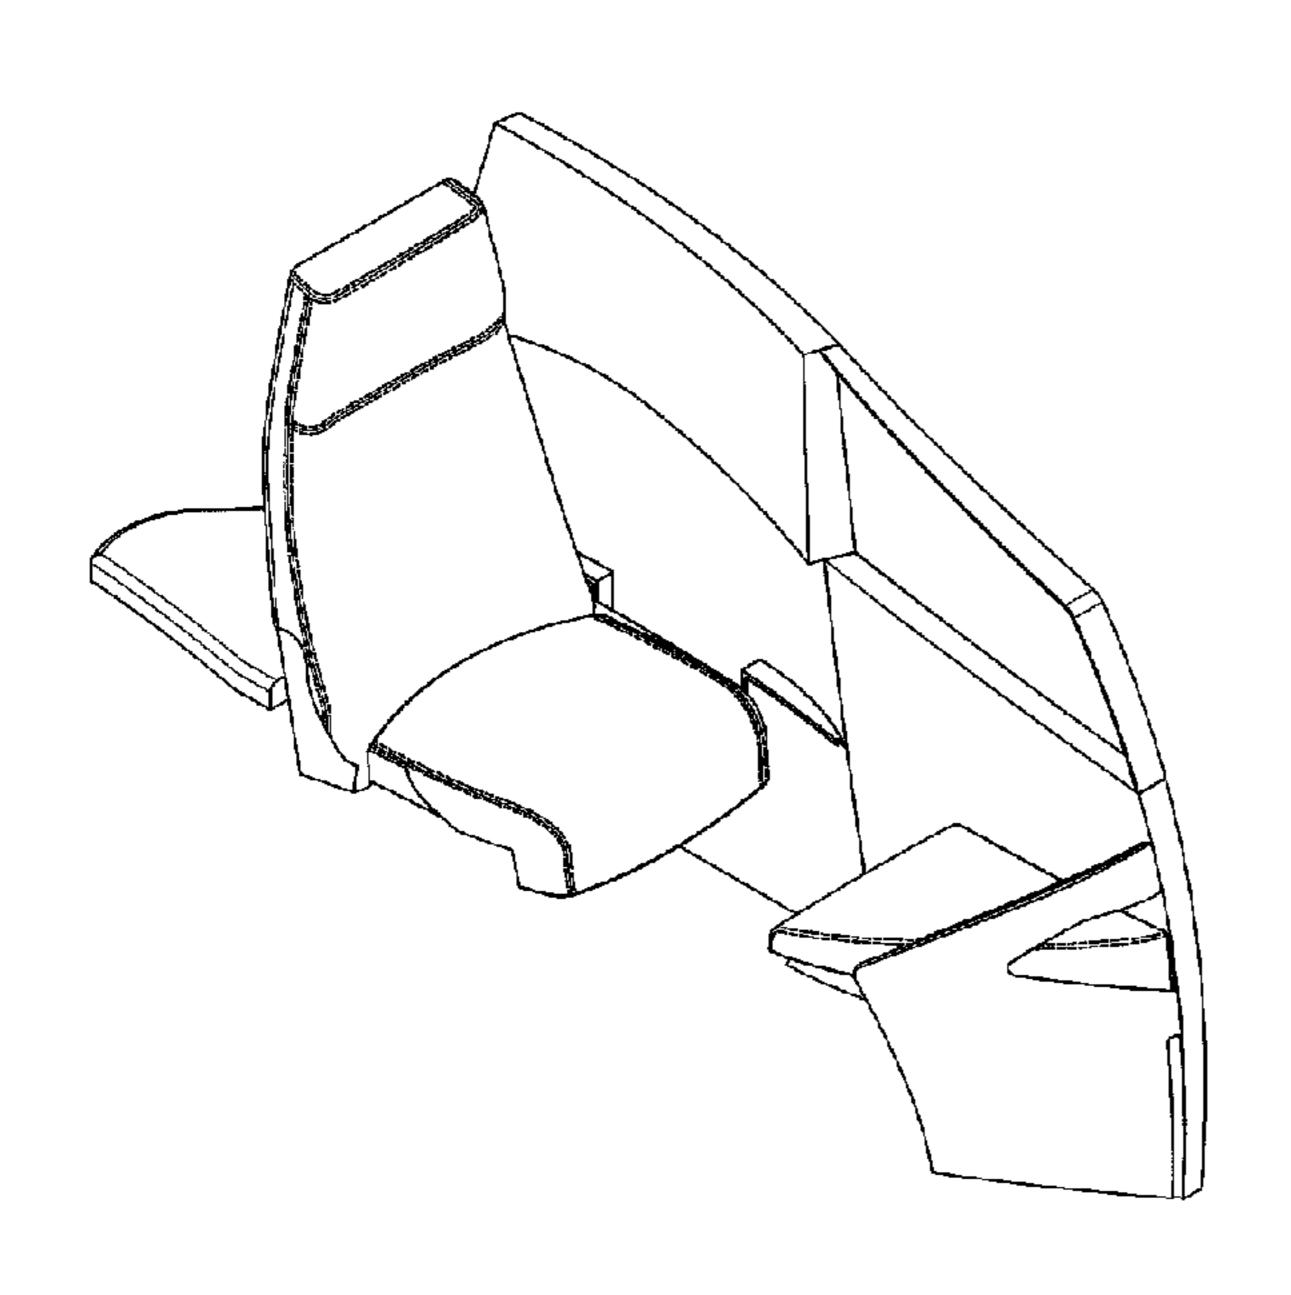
is a left, rear view of the aircraft seat showing our new design, in the upright configuration;
